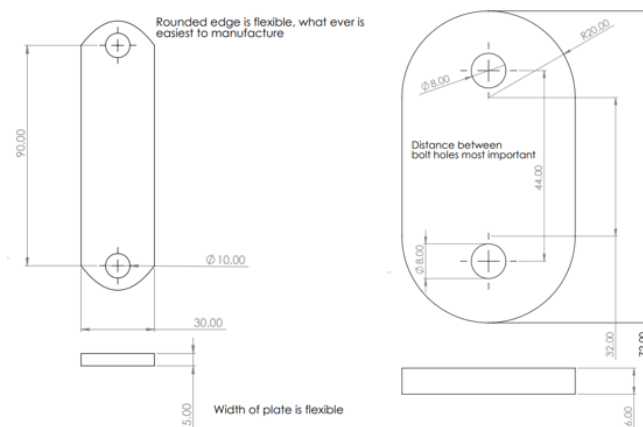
Air intake blanking plate (a) and oil breather tube blanking plate (b).
